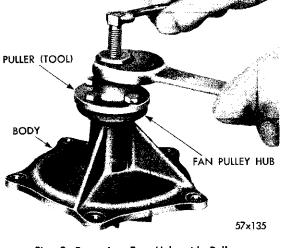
Removing Fan Hub with Puller using Tool C-3208
